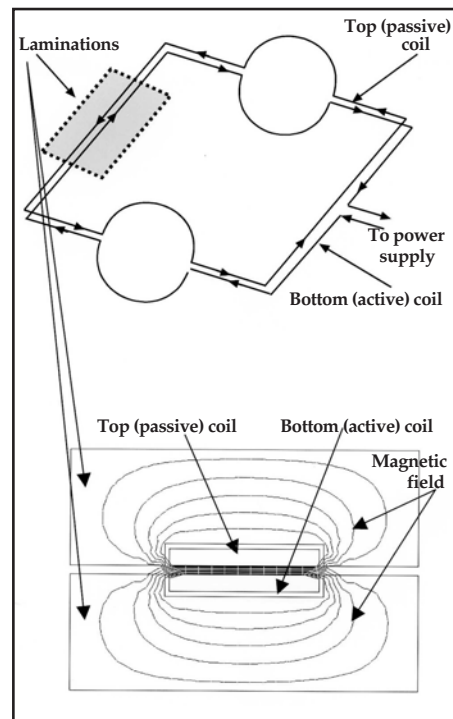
Top: Sketch of a SHarP-C coil circuit for crankshaft and camshaft hardening. Bottom: Magnetic coupling of the top and bottom coils.
